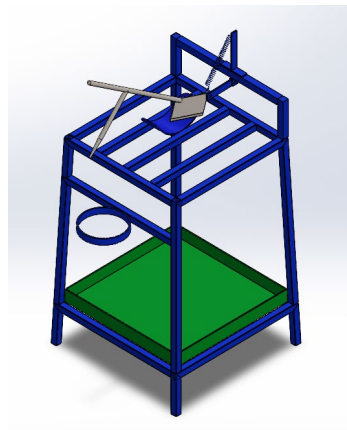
The fabricated prototype drawing using SOLIDWORKS software
